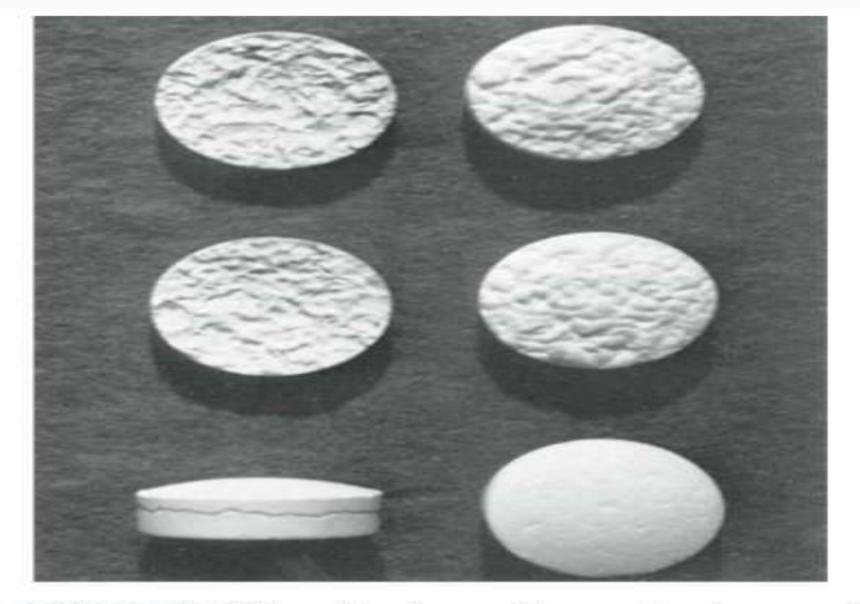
Tablets that have split on aging because of conditions of manufacture or storage.
